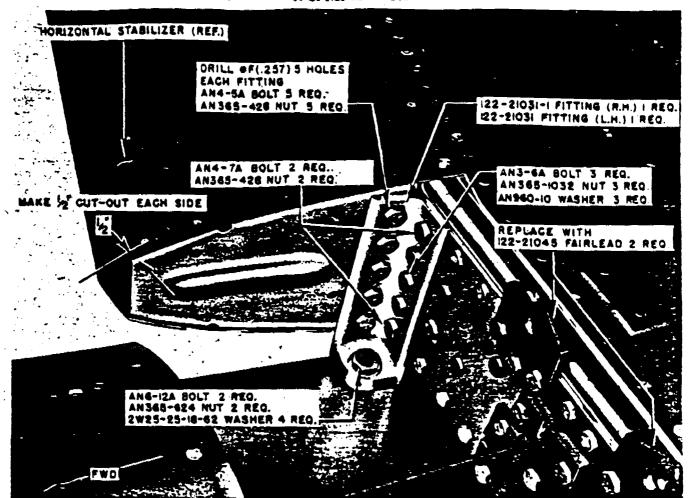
View Showing Front Casting Installed - Horizontal Stabilizer
